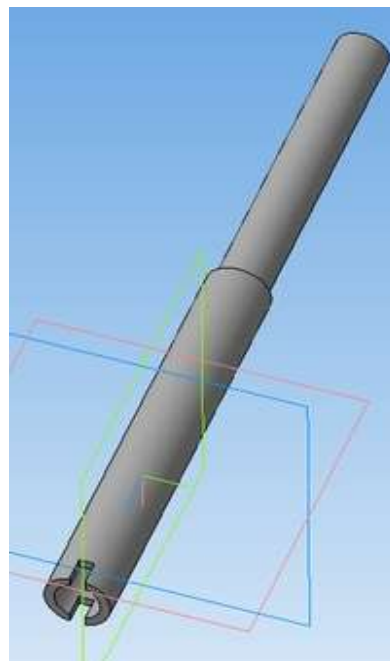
Three-dimensional model of a tubular drill bit (diameter of 10 mm)
